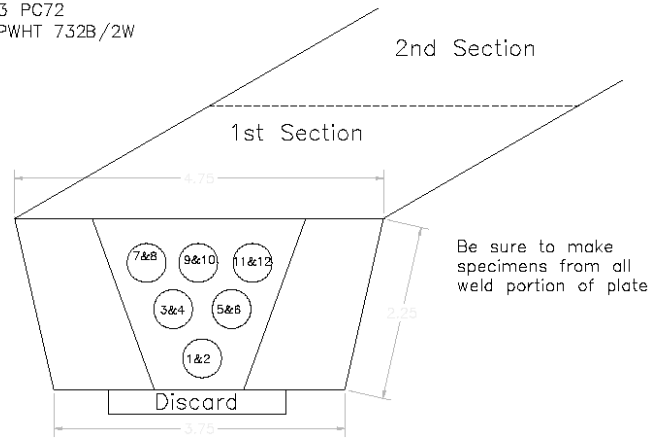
Typical Weld Metal and Weldment Specimen Cutting
